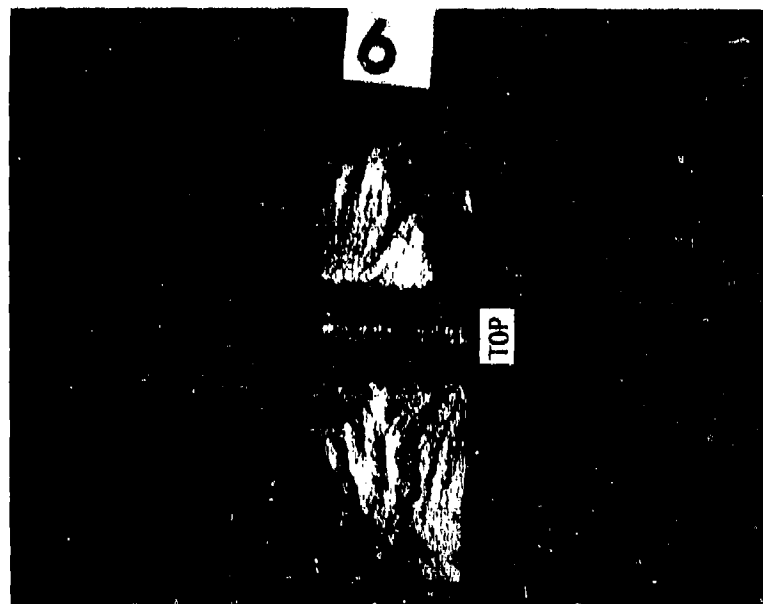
Close-up of Fatigue Failures of Specimens with Tridair and Groov-Pin 10-32 Size Inserts. Inserts Installed by AFML. Torqued Bolts in Inserts During Tests.
